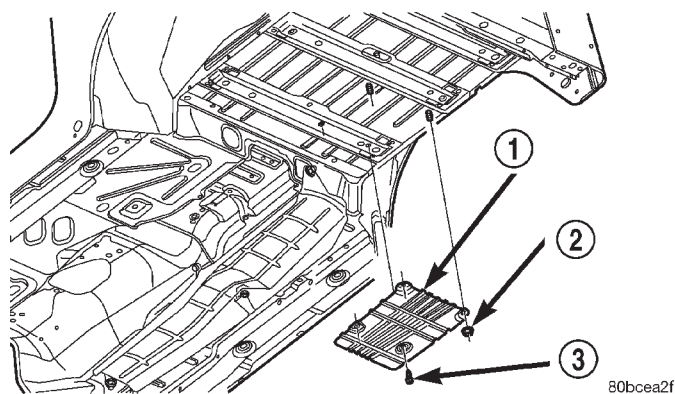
Muffler Rear Heat Shield Removal/ Installation
